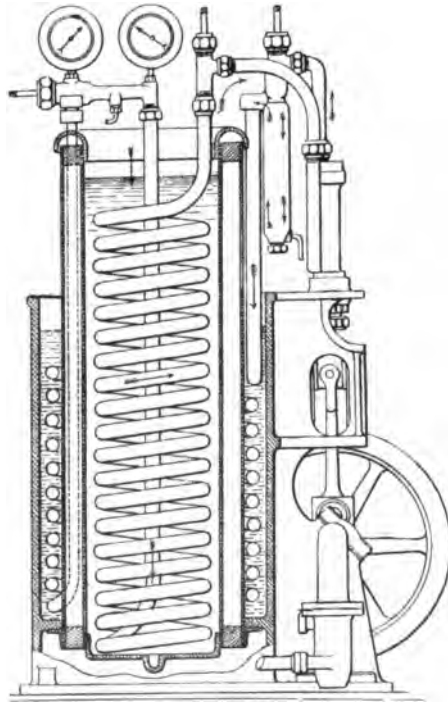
SECTION OF SMALL CARBONIC ACID MACHINE.
